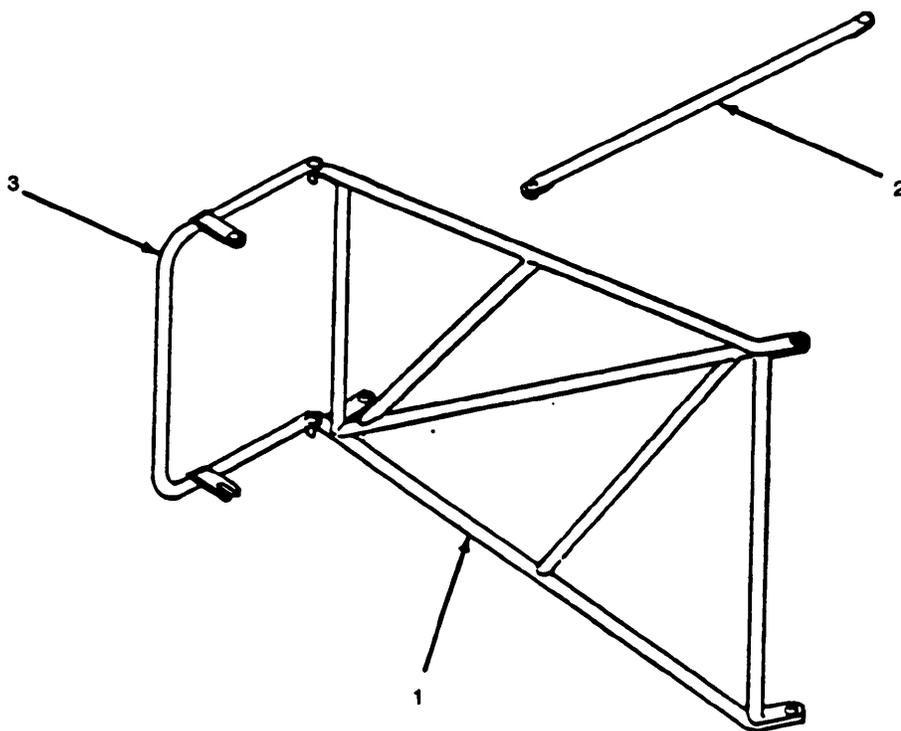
Mirror and Bracket Assemblies, Repair.
